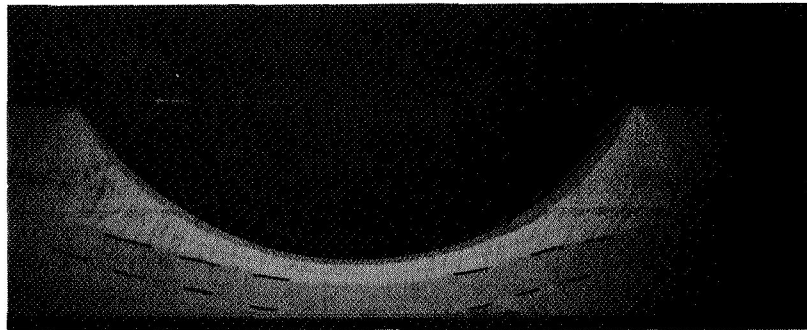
FRACTOGRAPH OF A CYCLIC TEST SPECIMEN ( $t = 1.00''$ , 2219 Aluminum Weldment @  $-320^{\circ}\text{F}$ , Specimen No. AWC 80N-5)
